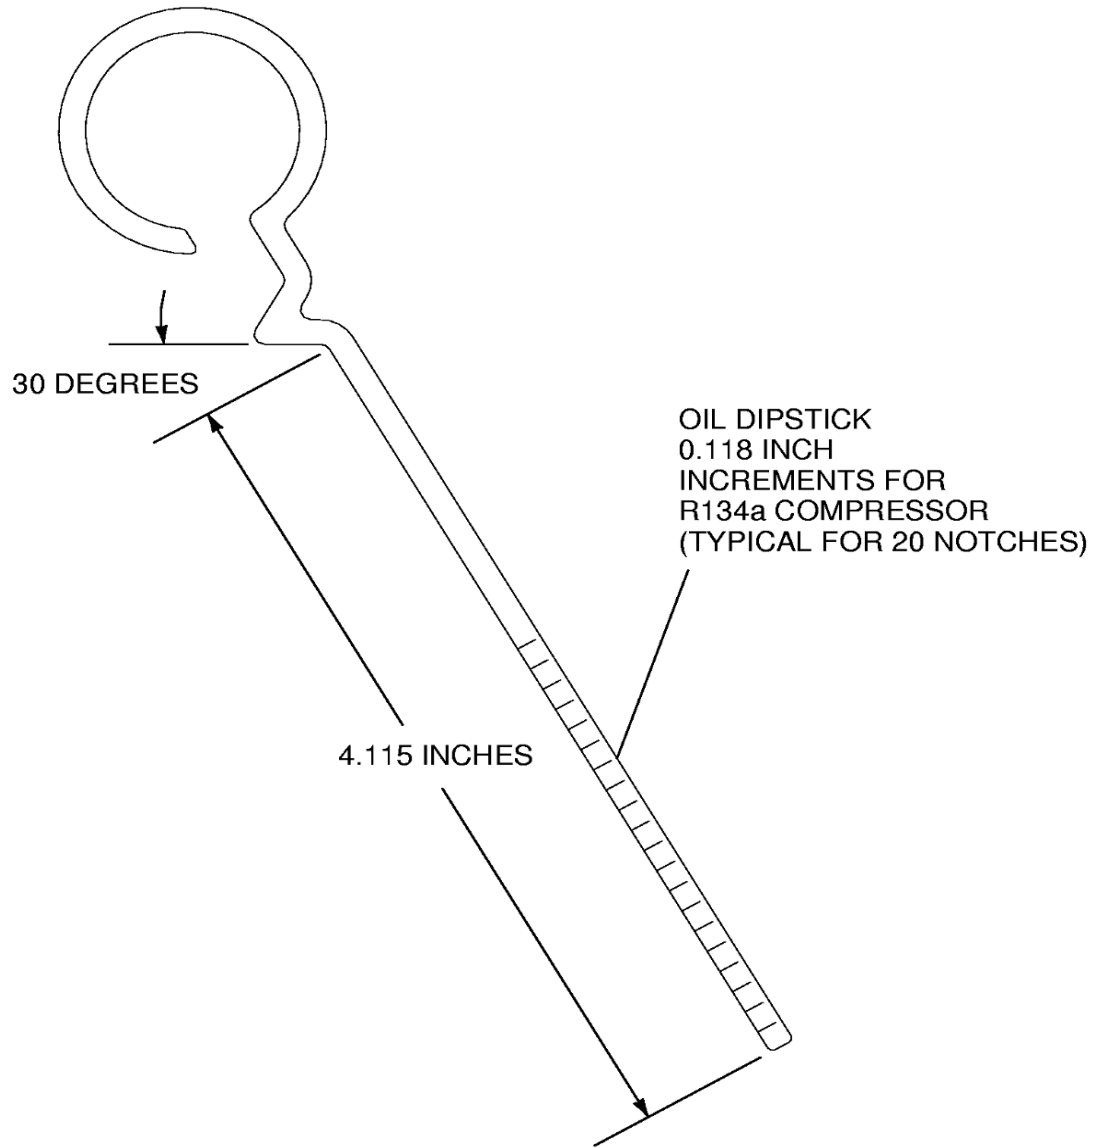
Sheet 2 : R134a Compressor Oil Level Check
